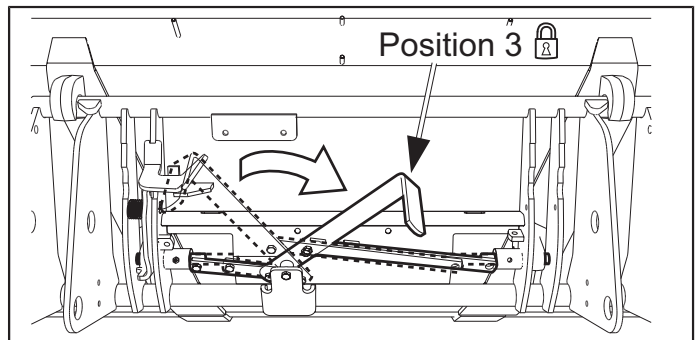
Carefully check how YOUR tool carrier indicates a locked implement
